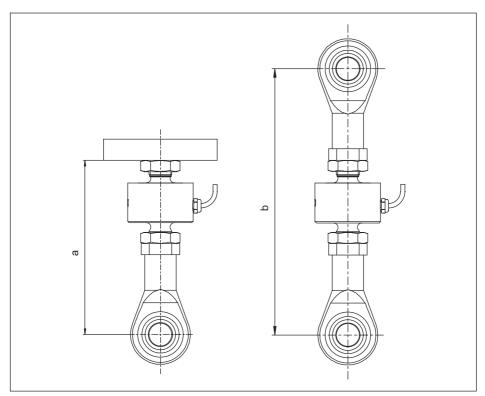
U9C dimensions when using one or two knuckle eyes.
